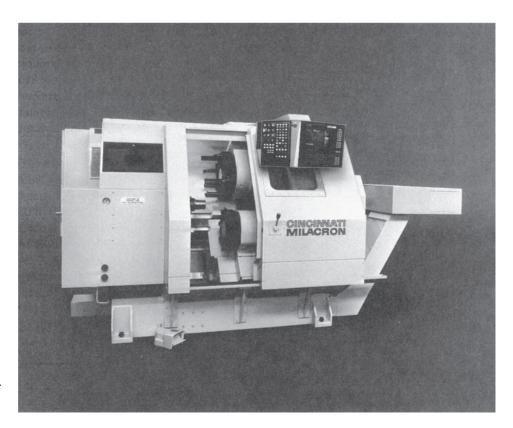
CNC four-axis turning center. (Courtesy of Cincinnati Milacron).
